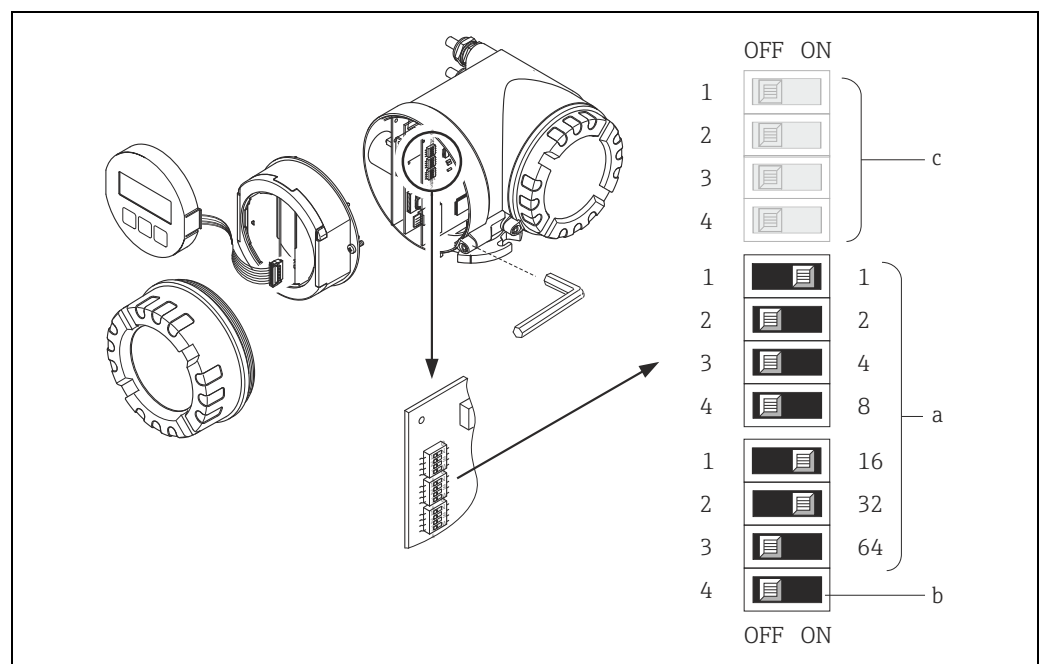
Addressing with the aid of miniature switches on the I/O board
